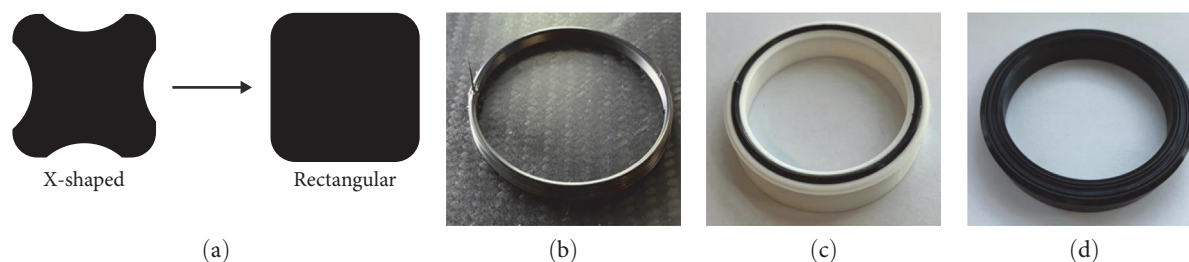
Additive manufacturing of the rod seal. (a) Geometrically shaped design of the O-ring, (b) printed O-ring, (c) assembled seal of both additively manufactured parts, and (d) conventional rod seal with X-shaped O-ring.
